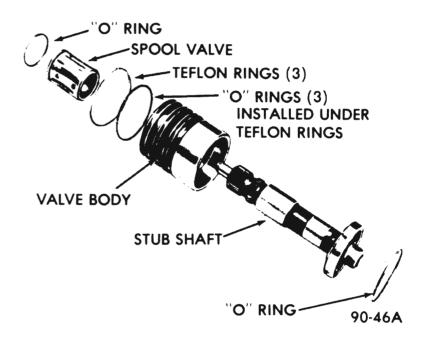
Exploded View - Valve Body and Shaft Assembly
